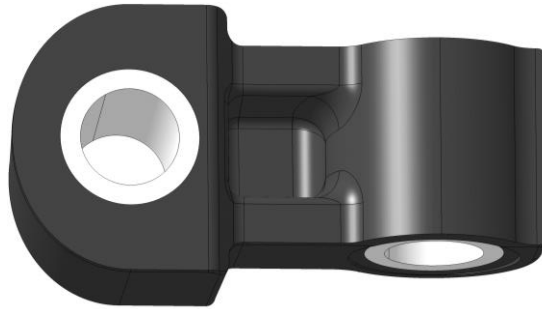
Geometry demonstrator, derived from an actual chassis part.
